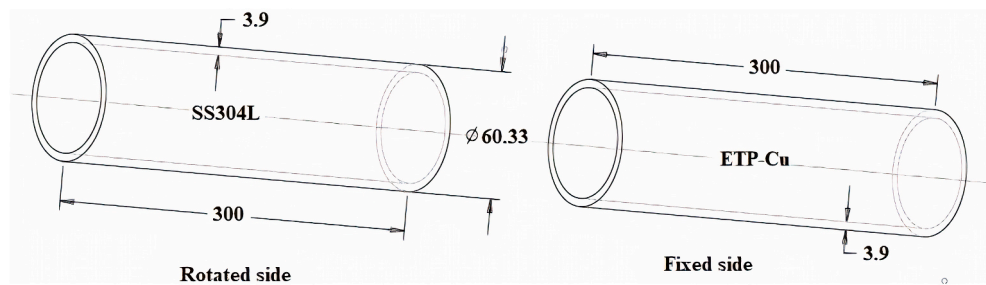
Dimensions of pipes and position in friction welding machine.
